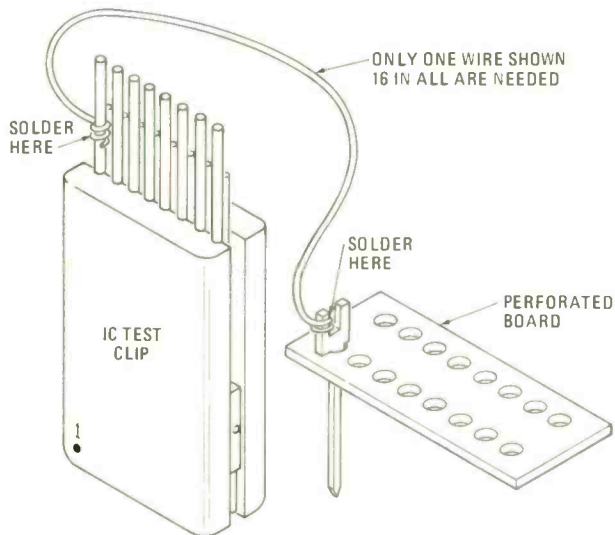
IC TEST CLIP can be modified with a piece of cable and a homebrew jig to plug directly into an IC socket.
